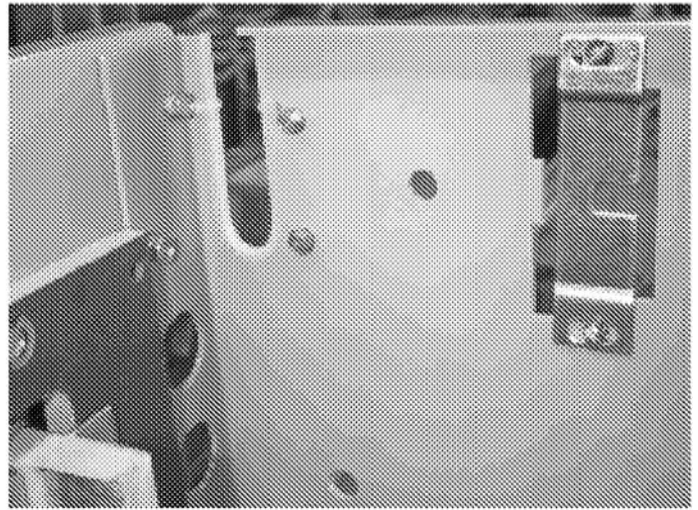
Inside rear corner of the Type 3 Draw-Out Substructure, showing the wire-exit hole and the Secondary Disconnect mounting slide.
